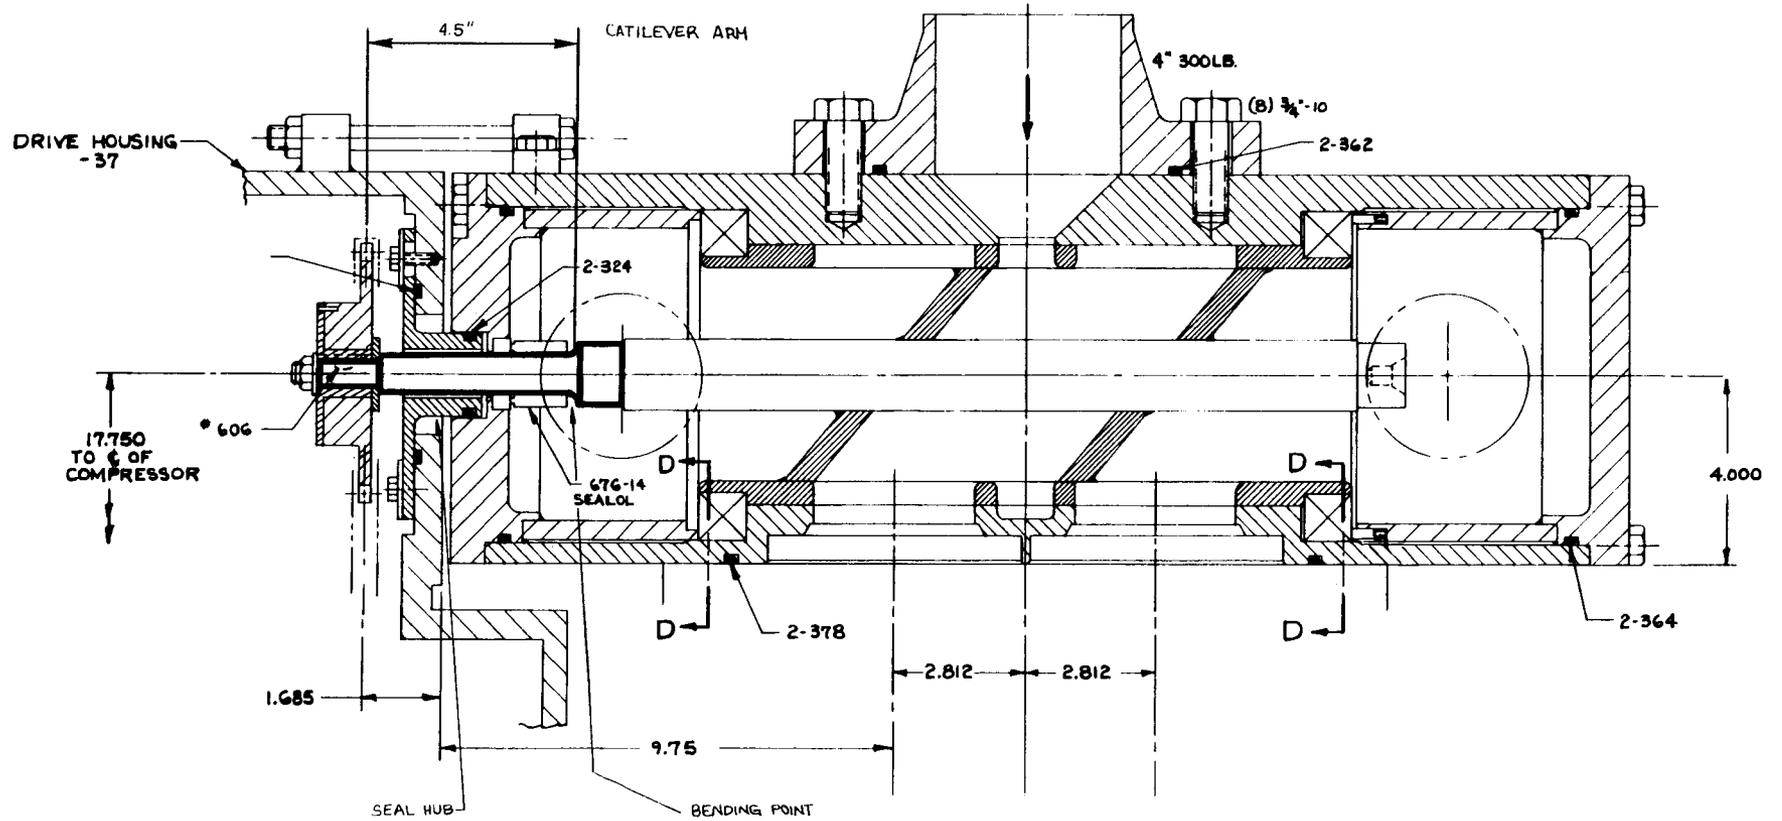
Rotary Valve Drive Shaft Before Modifications
